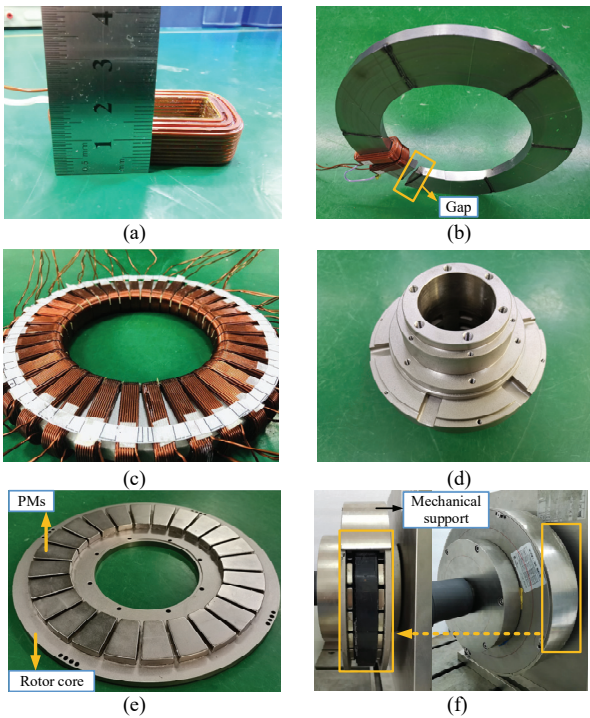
Prototype of the EDTW-DRSAFPM machine. (a) Toroidal winding. (b) Stator core. (c) Stator. (d) Shaft. (e) Rotor. (f) Prototype.
